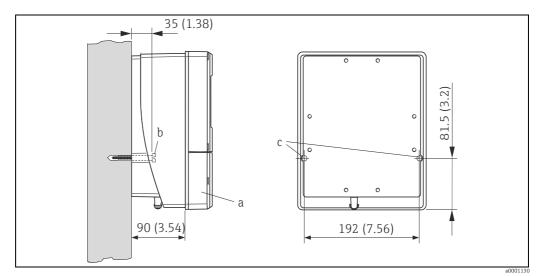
Mounted directly on the wall. Engineering unit mm (inch)
